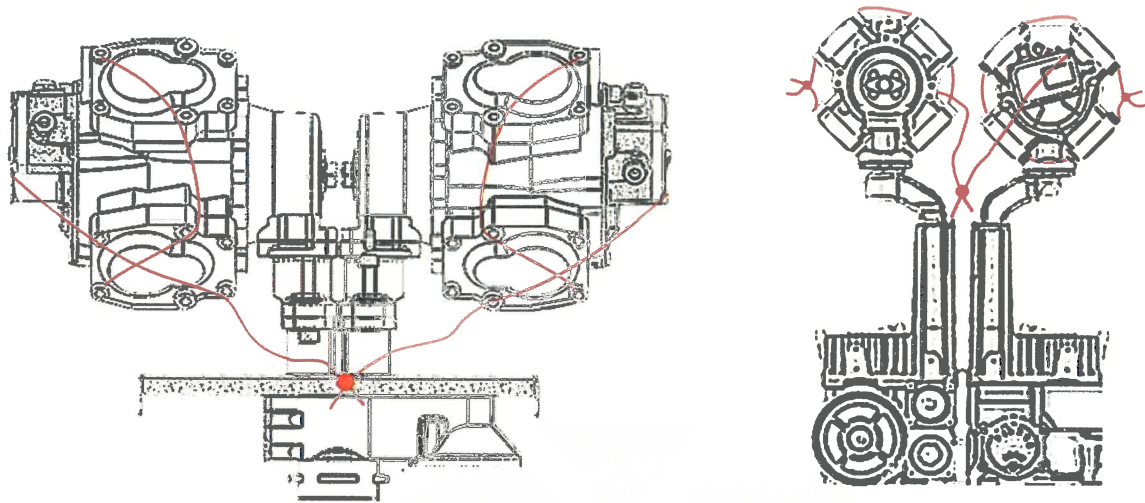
The sealing of the measurement transducer Q-Meter type 2 with Smart pulser 2
